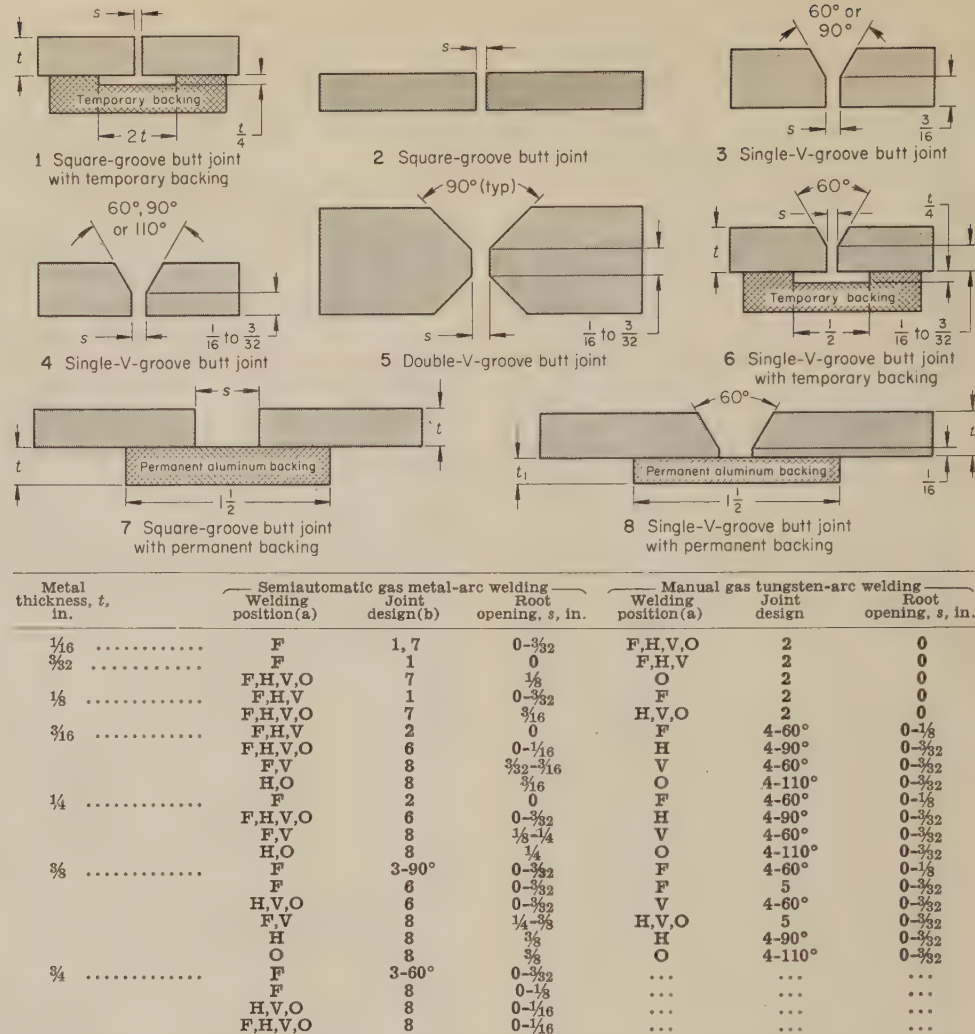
Recommended butt-joint designs for the gas metal-arc welding (dcrp) and gas tungsten-arc welding (ac) of aluminum alloys. Joints 2, 3, 4, 5 and 6 should be back gouged to solid weld metal before applying a pass on the root side.
